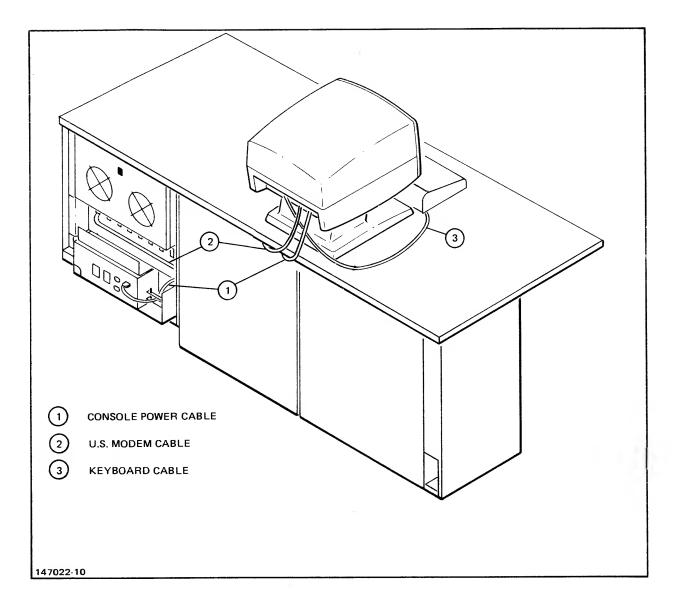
Panel-to-Console Cable Routing and Connection View
